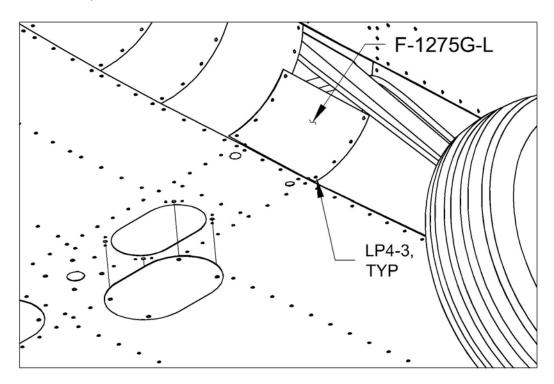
F: F-1275G-L COVER PLATE REMOVAL
